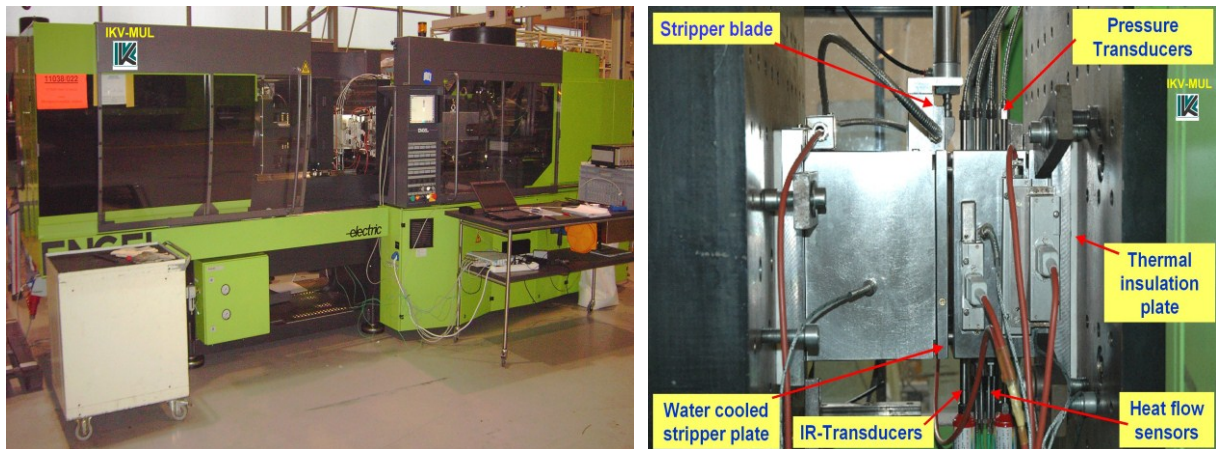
Injection moulding machine with rheological injection mould using slit die insert.
